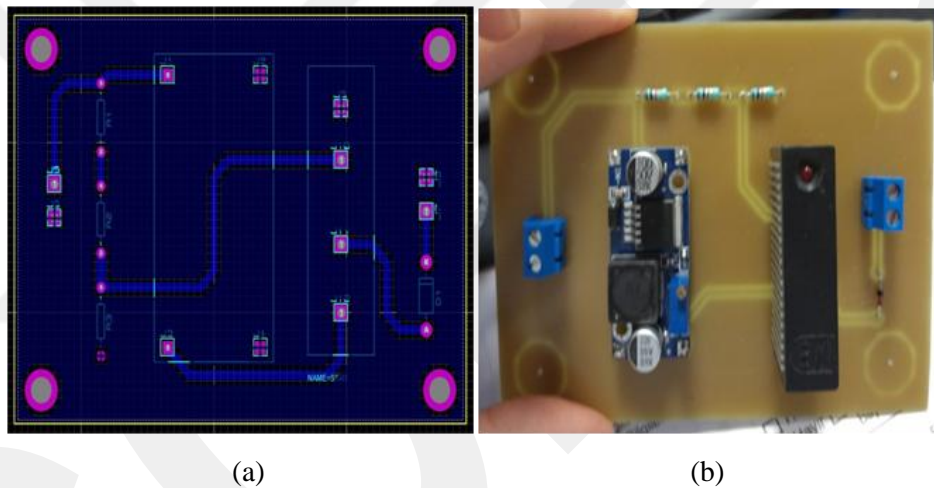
Design of trigger card, (a) PCB layout, (b) PCB.
